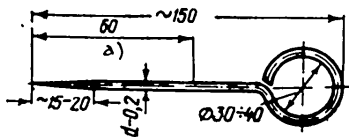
Awl for Punching Holes in Thiokol Tape before Insertion of the Rivets
